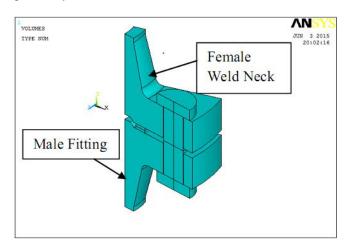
1/8th part model of Flange joint (Gasketed)
